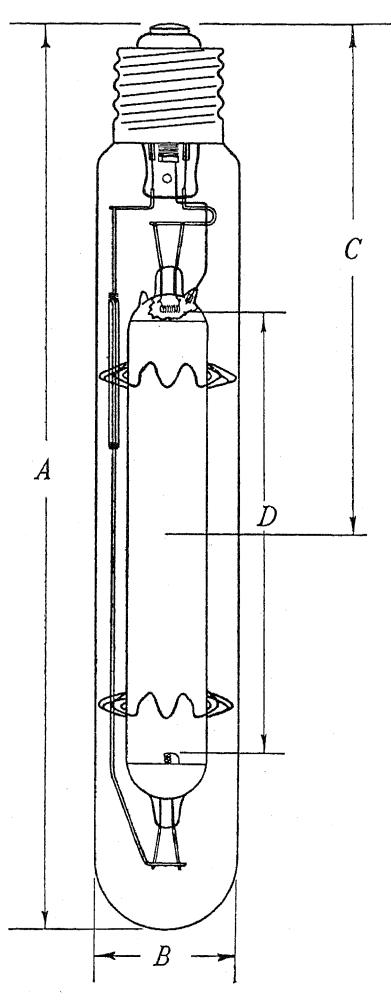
Typical construction and dimensions of h.p.m.v. lamps.
